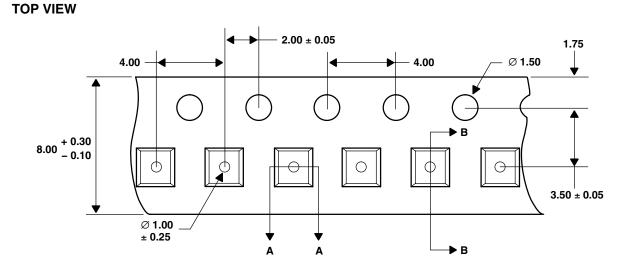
Package FN — Dual Flat No-Lead Packaging Configuration
